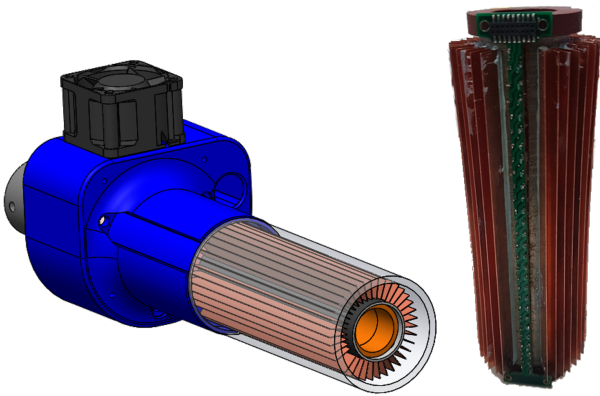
The motor cooling system and fabricated fin array on the back-iron tube.
